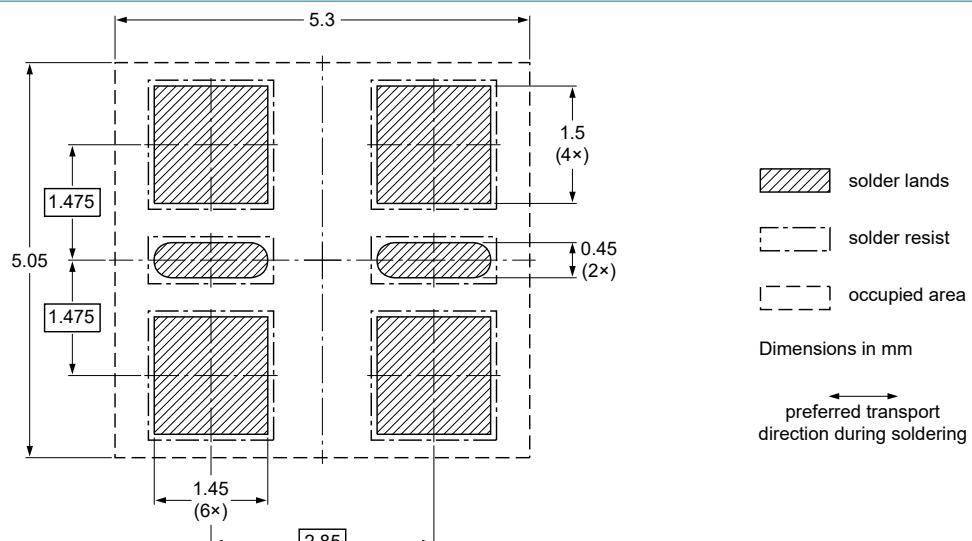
Wave soldering footprint for SC-74; TSOP6 (SOT457)
